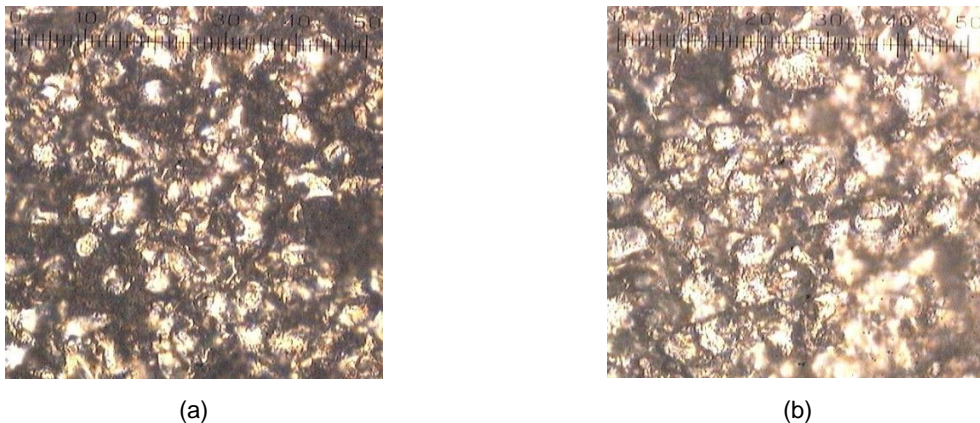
Microscopic view of machined surfaces. (a) Workpiece machined surface for single electrical signature; (b) Workpiece machined surface for multiple electrical signatures. Note, global scale dimension equal to 0.1 mm.
